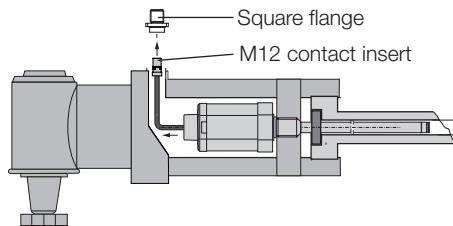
Plug-in system based on the example installing the BTL in a hydraulic cylinder
